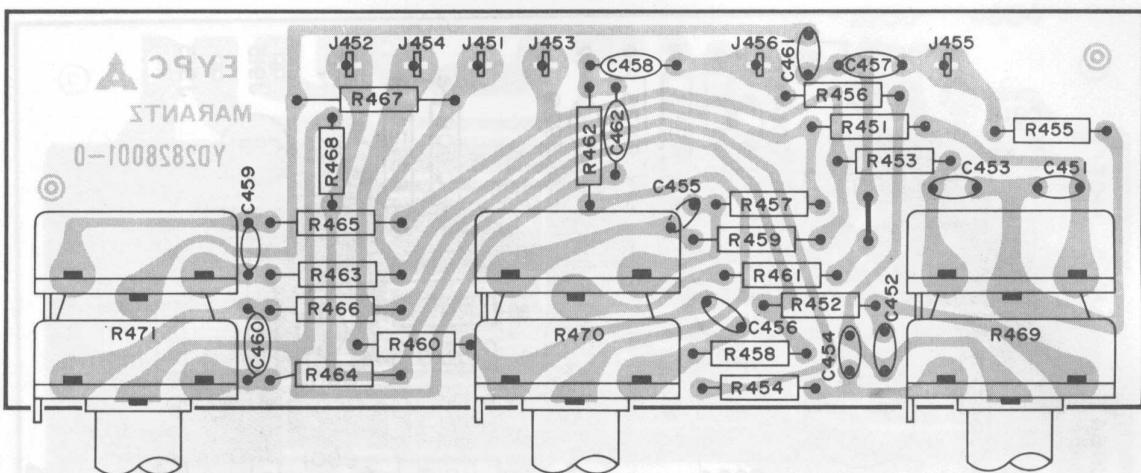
Tone Control Volume Unit Assembly P450 Component Locations
